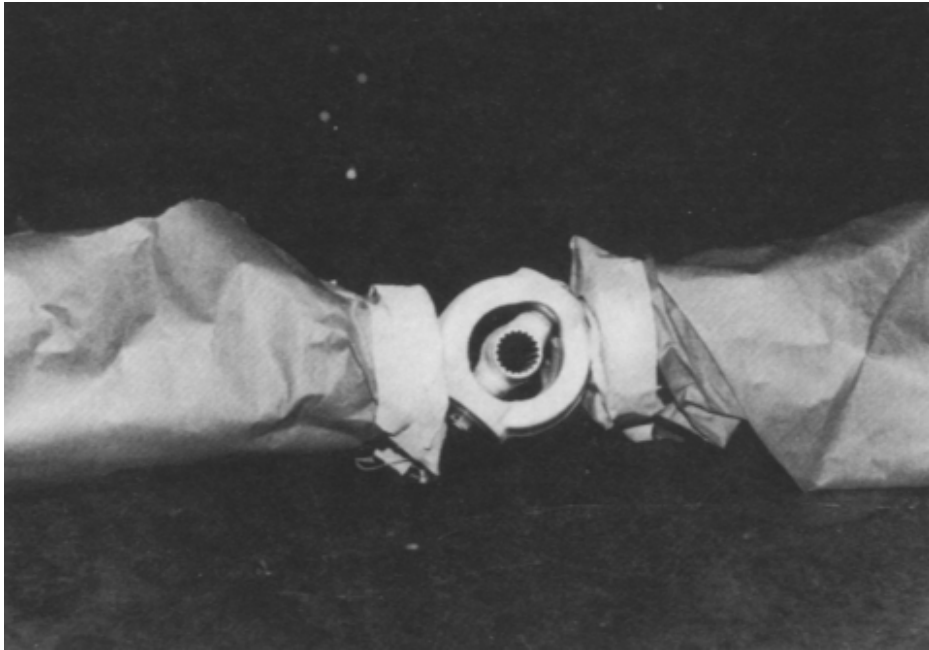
Tail rotor masked for dye penetrant inspection
